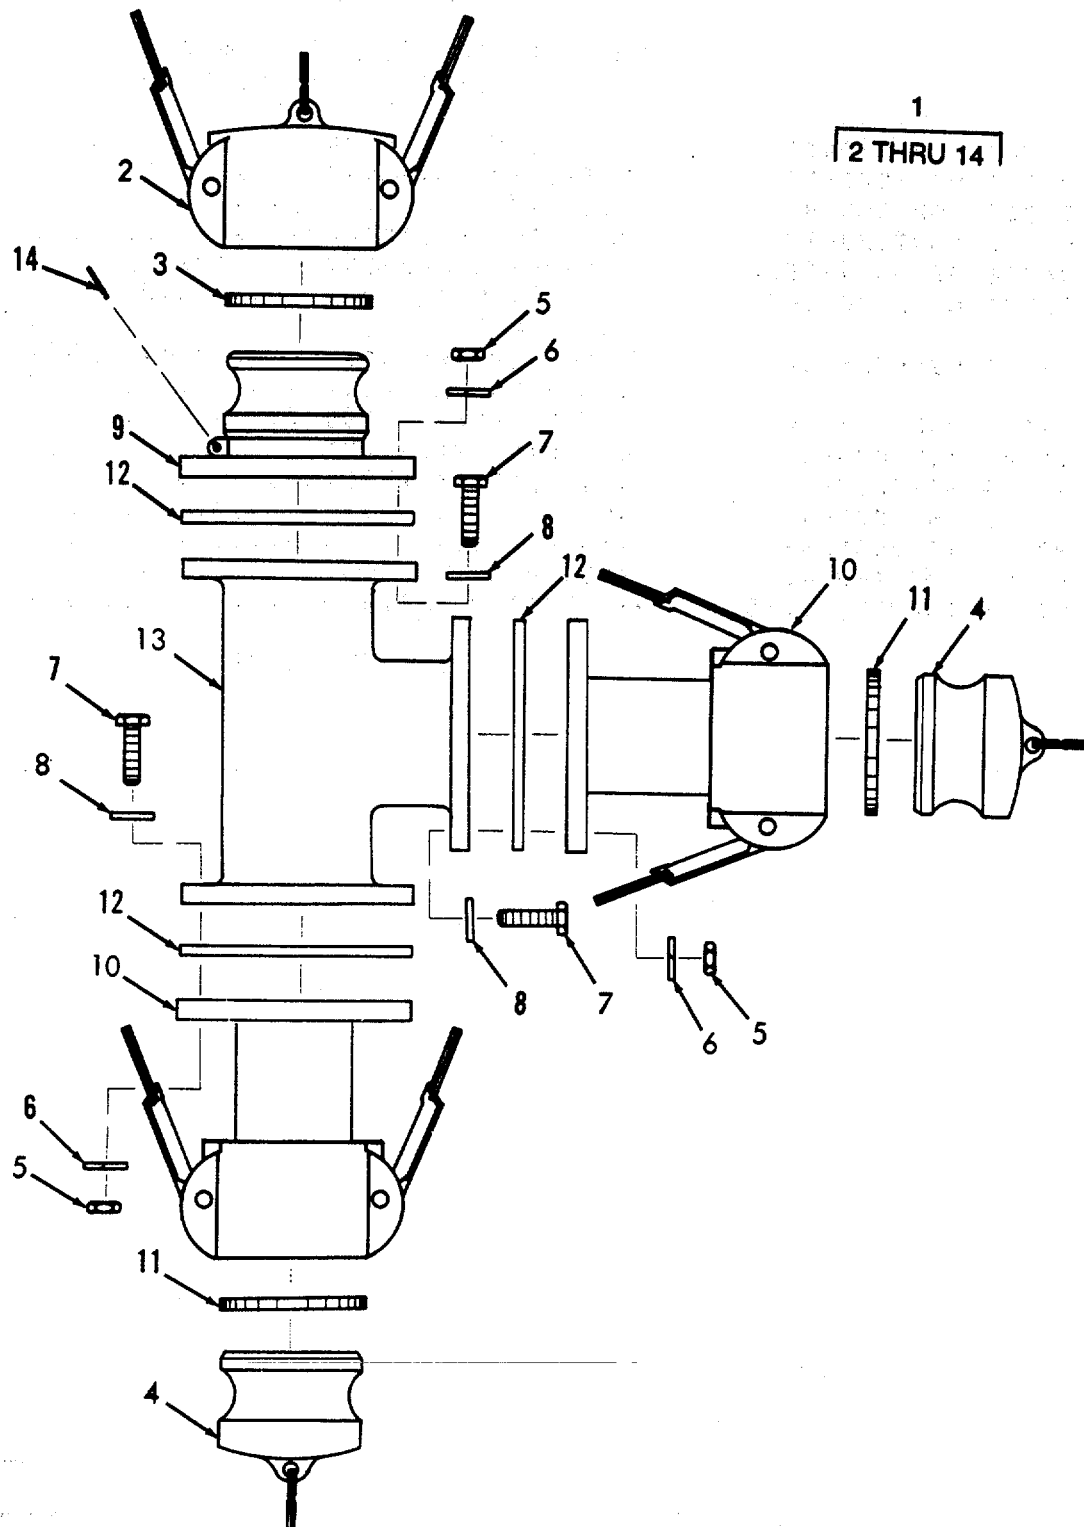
Tee Assembly, Quick Disconnect, 4.00 in.
